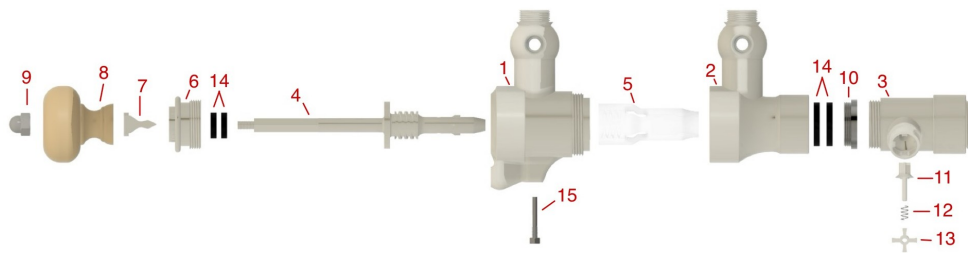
Exploded view of the final injector. Exploded view of the final injector. 1. Upper body 2. Middle body 3. Lower body 4. Spindle 5. Steam nozzle 6. Upper stuffing box 7. Indicator 8. Handle 9. Handle nut 10. Lower stuffing box 11. Overflow valve 12. Overflow spring 13. Overflow spring stop 14. Graphite stuffing 15. Positioning screw
